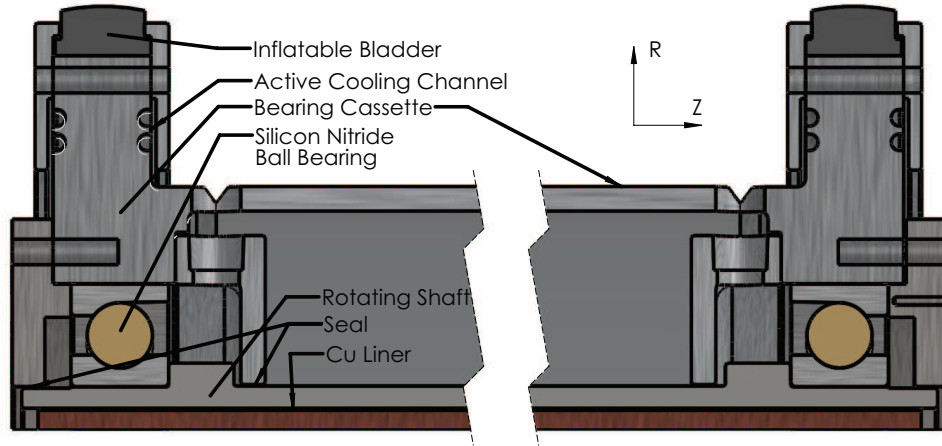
Cross sectional view of rotating wall assembly. The shaft is held in place by angular contact bearings and can rotate at a maximum speed of 280 km/h.
